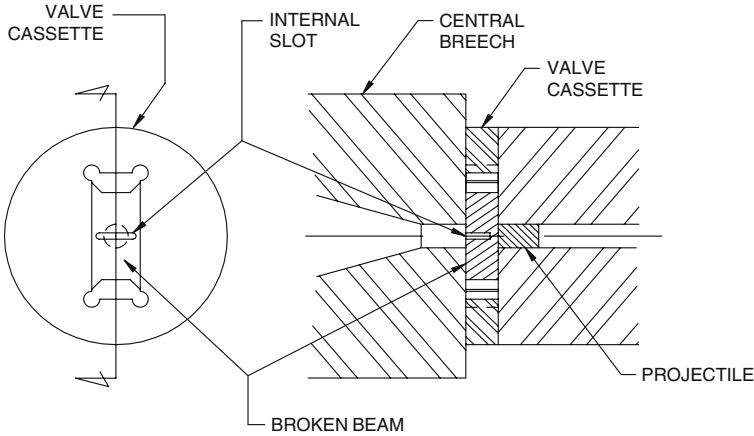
Sketch of a broken beam quick opening valve installed at the base of a light-gas gun launch tube
